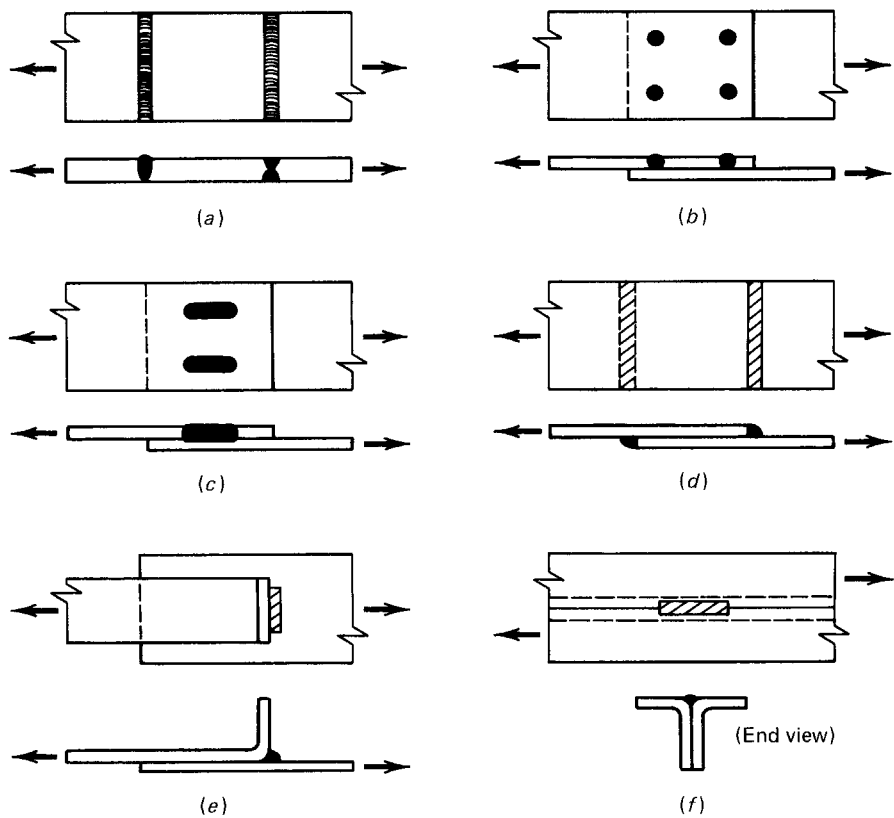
Types of arc welds. (a) Groove welds in butt joints. (b) Arc spot welds. (c) Arc seam welds. (d) Fillet welds. (e) Flare bevel groove weld. (f) Flare V-groove weld.
